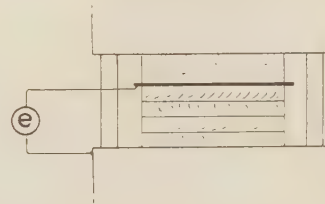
TYPICAL SETUP OF GLUING ONE ASSEMBLY AT A TIME
